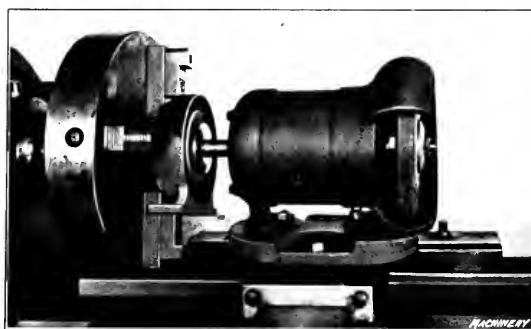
Grinding Attachment working on an Internal Grinding Operation
